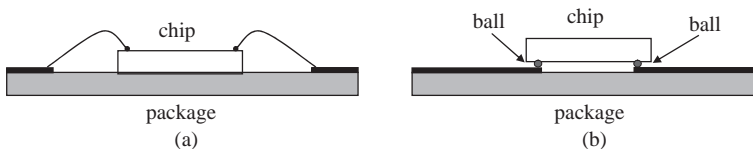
Type of die attachment: (a) wire bond; (b) flip chip
